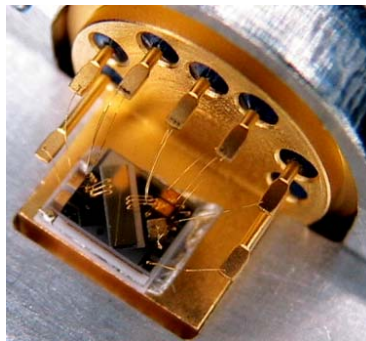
Integrated CoS-TEC-header with wire bonding
